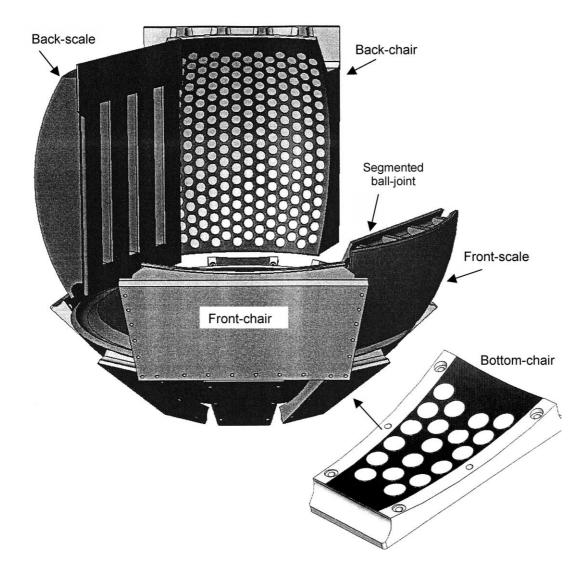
Modified ball-joint with machined holes (Ø 250 mm×32 mm) on the back, front and bottom chairs for incorporation of polymer discs.
